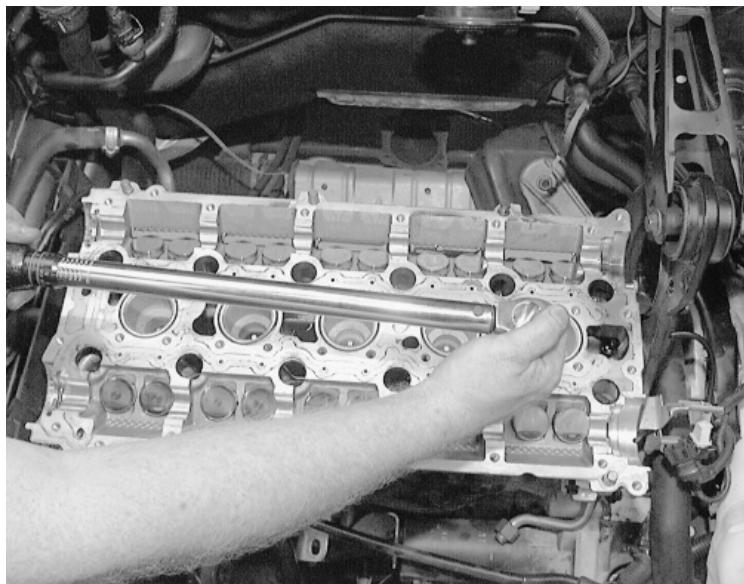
Tighten the cylinder head bolts in proper sequence to specification using a torque wrench
